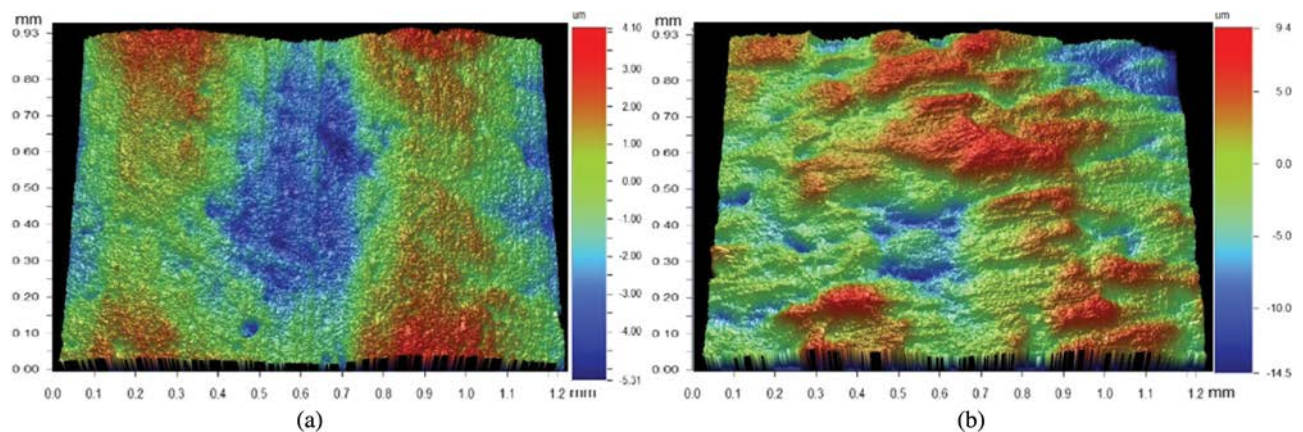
Surface topography in SPIF: (a) internal tool-sheet contact surface; (b) external noncontact surface (shape: a 45° cone, step down: 0.5 mm, feed rate: 1000 mm/min, tool diameter: 10 mm, sheet thickness (AA7075-O): 1.02 mm).
